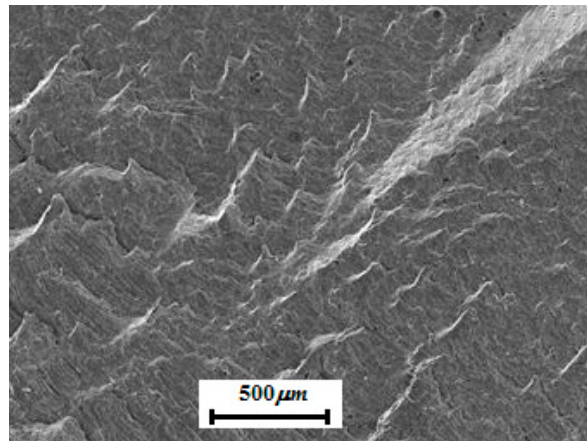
Low-cycle fatigue fracture morphology.
